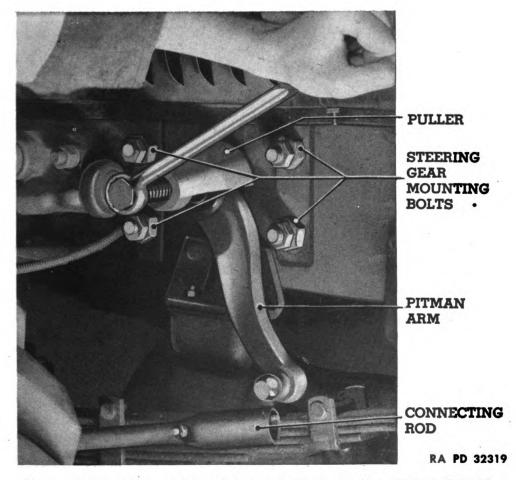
Pitman Arm Removal, Using Puller (41-P-2952)
